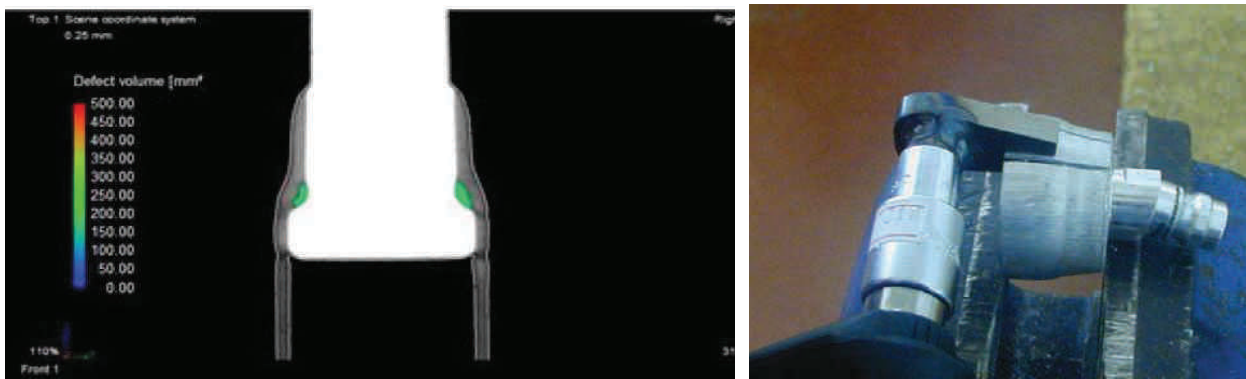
(a) Example of a CT image made of a MP welded specimen [6]
